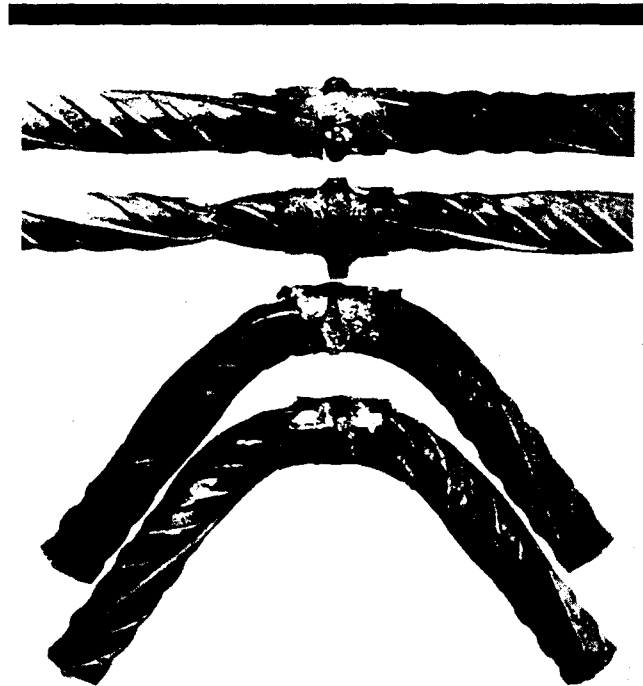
Thermit Welded Reinforcing Steel Bars After Tensile and Bend Testing
